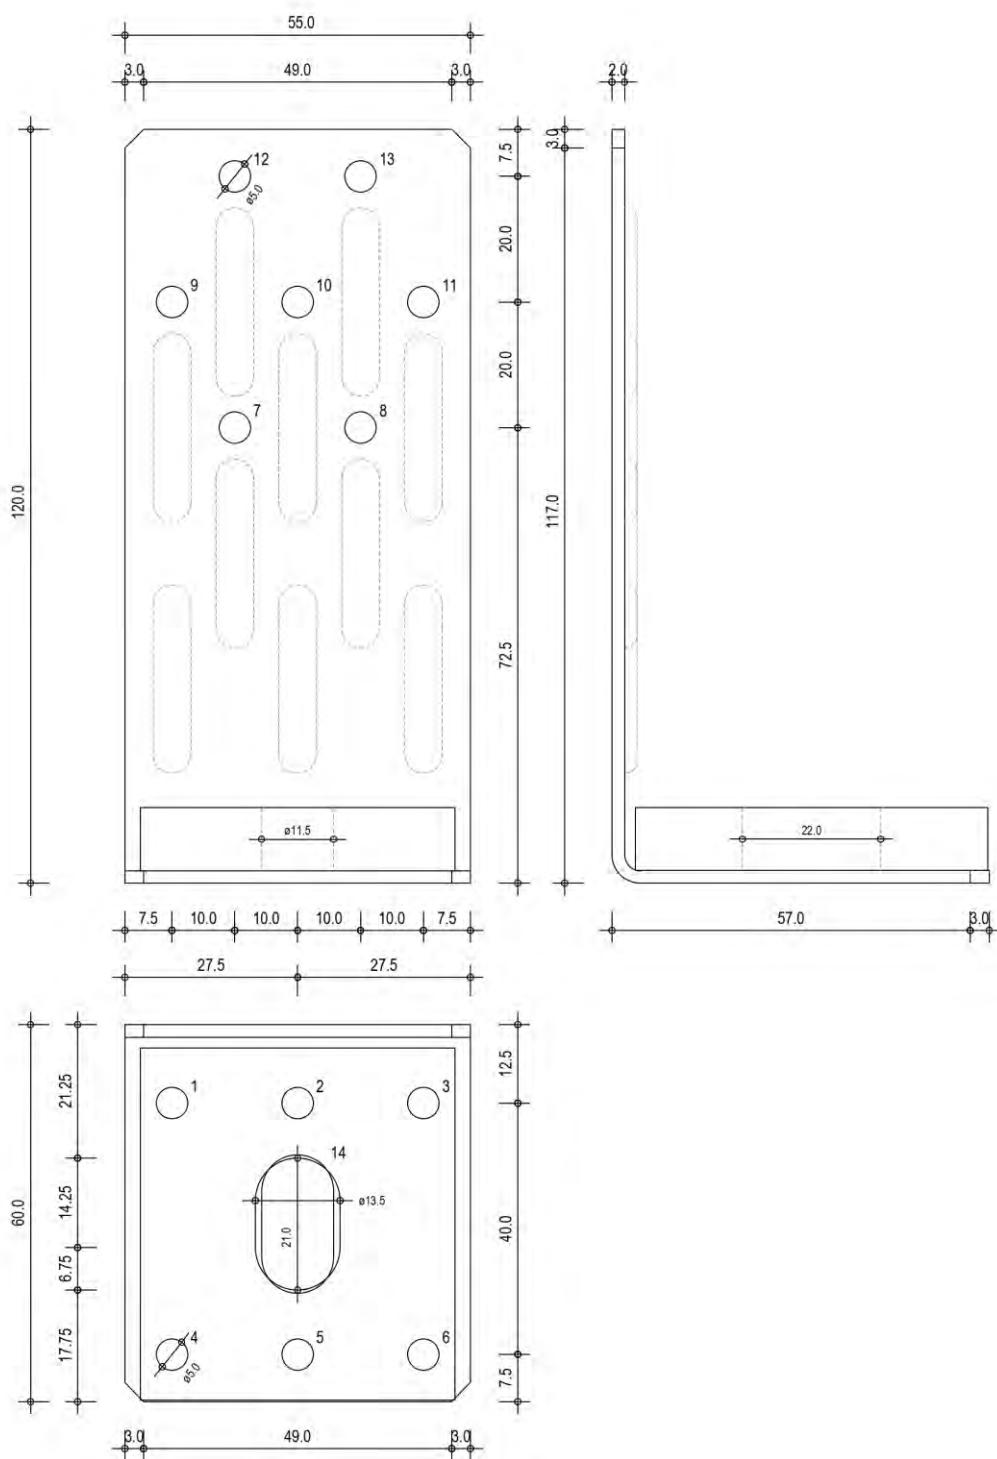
Dimensions of Angle Bracket 110836 and Washer 111307
